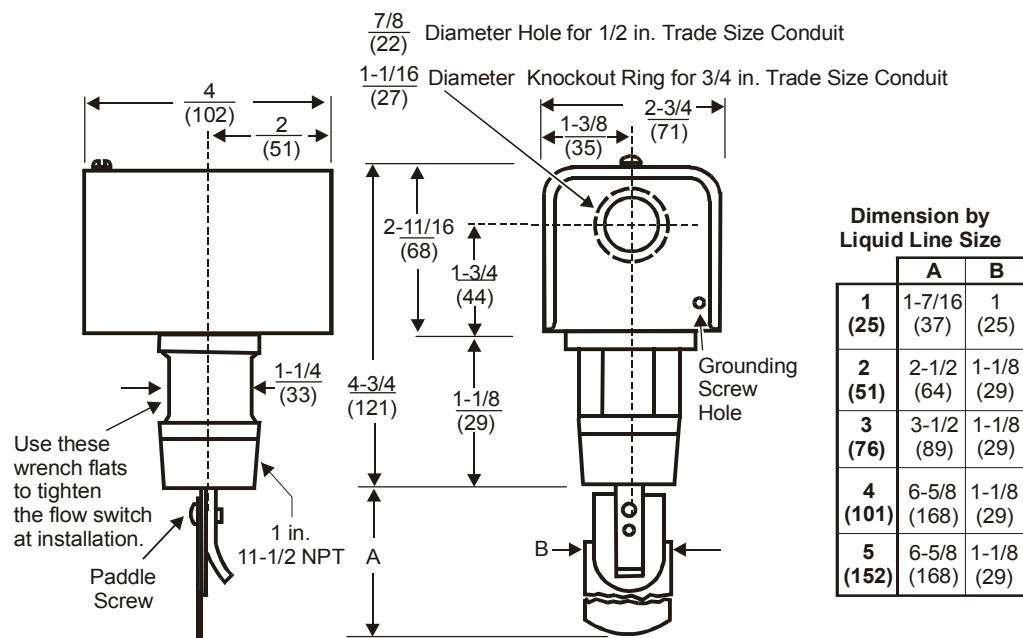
NEMA 1 Enclosure (F61KB Types) Dimensions, in./mm
